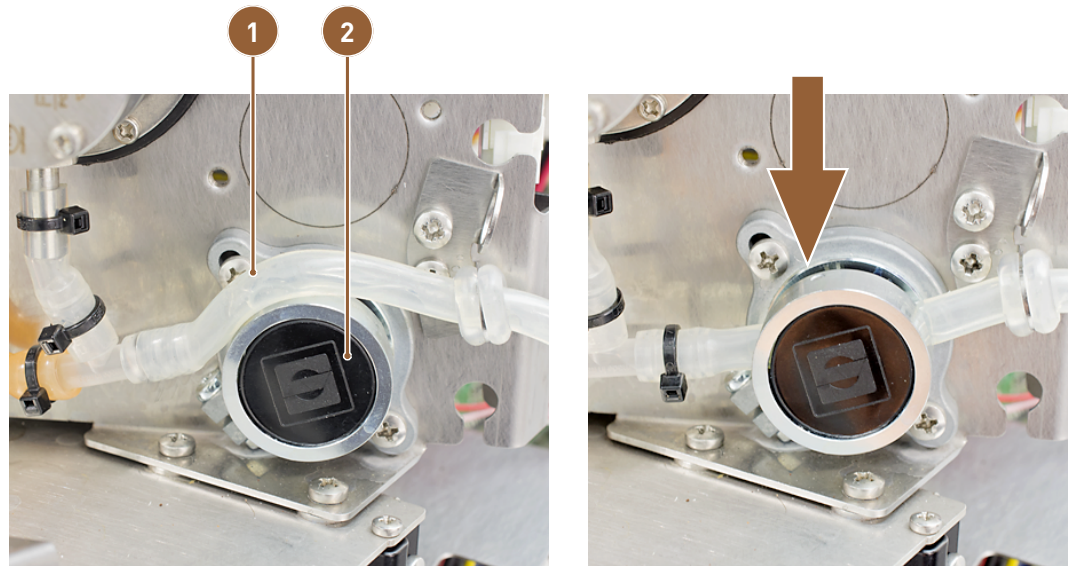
Inserting milk hose into squeeze valve (Single Milk)
